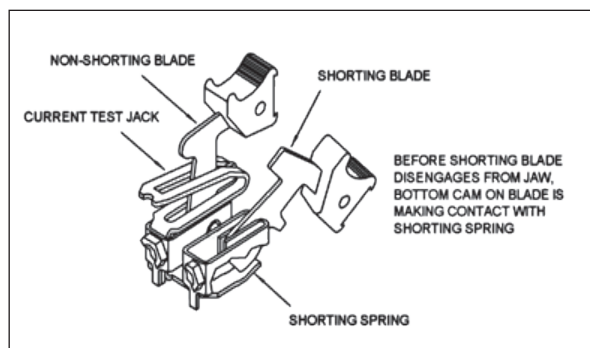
Blade assembly of 2 position pole "C-C" (rear view outside of base)
